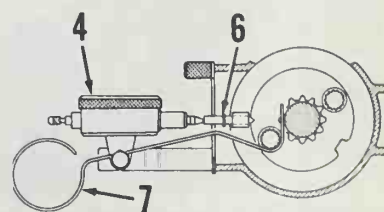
Install timing tools as shown to time Roto Diesel fuel injection pump.
